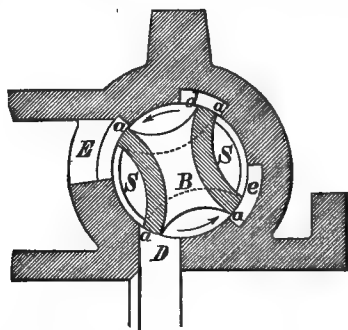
Fricart's balanced valve, by DeVilleville-Chatel & Co., Belgium.
